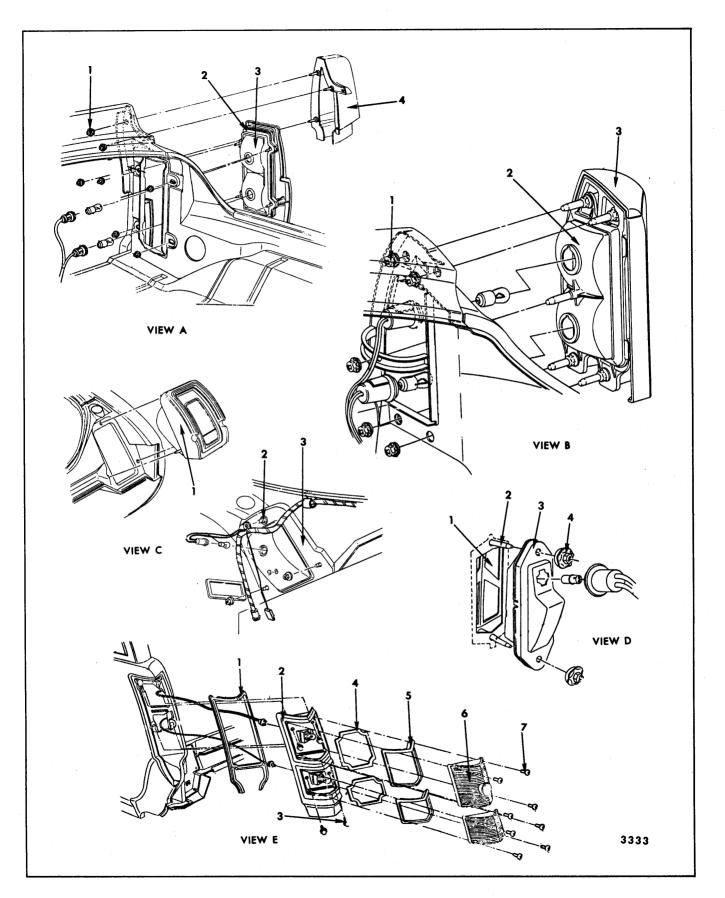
Tail Lamp - Oldsmobile Styles
